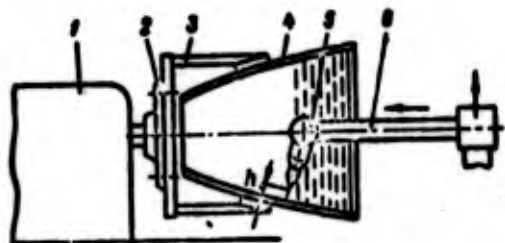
Applying of solder on the internal surface of the jacket of a nozzle: 1 - machine tool; 2 - faceplate; 3 - device; 4 - article; 5 - metal spray gun; 6 - holder.
